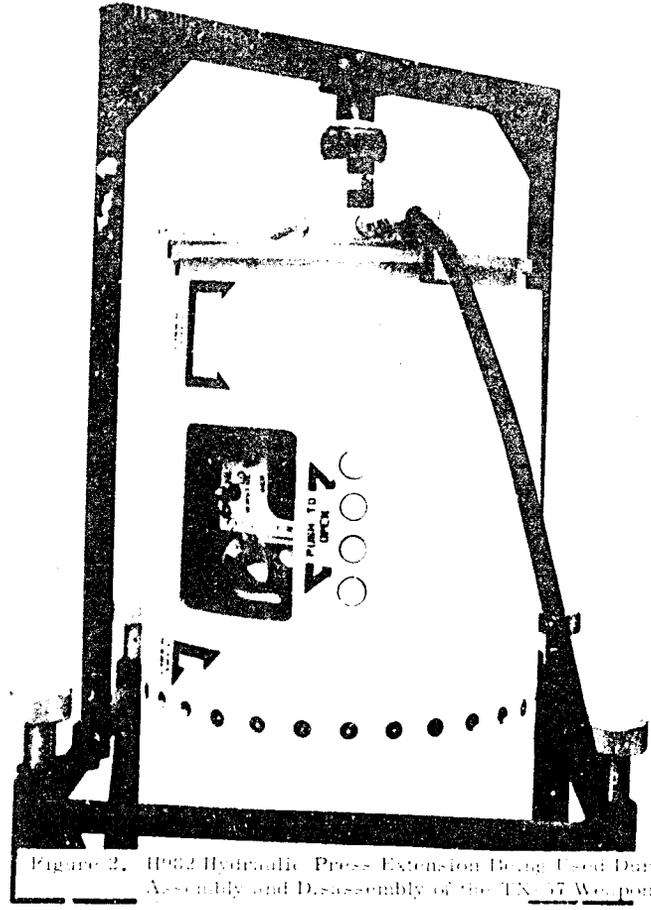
H982 Hydraulic Press Extension Being Used During the Assembly and Disassembly of the TX-67 Weapon
